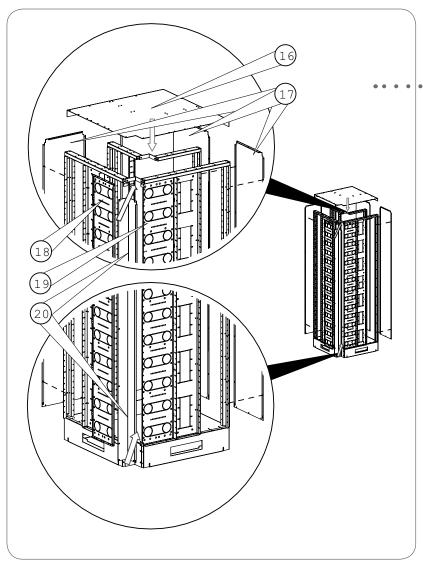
Installing corner cabinet roof (16), corner cabinet back plates and back plates (17), joint front partition wall (18), front partition wall (19), and front vertical profile (20) to the frame structure.
